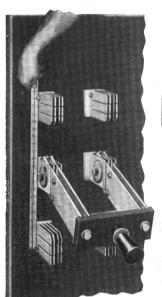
The Outside Blades of the Hinge and Break Jaws Should First be Checked to See that They are in Line. A Steel Scale Can be Used for this Purpose, First Making Sure the Switch is "Dead."
